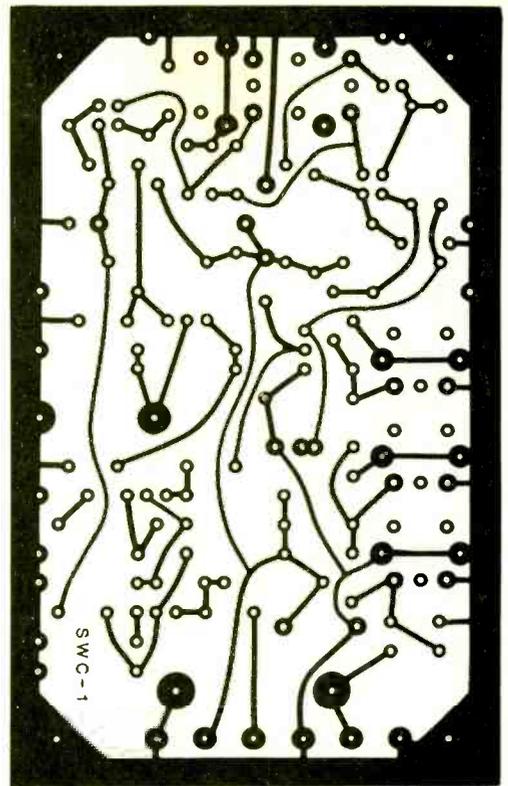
FOIL TEMPLATE is shown here in exact size. You can make your own printed-circuit board or purchase one directly from a supplier. Details are in the Parts List.
